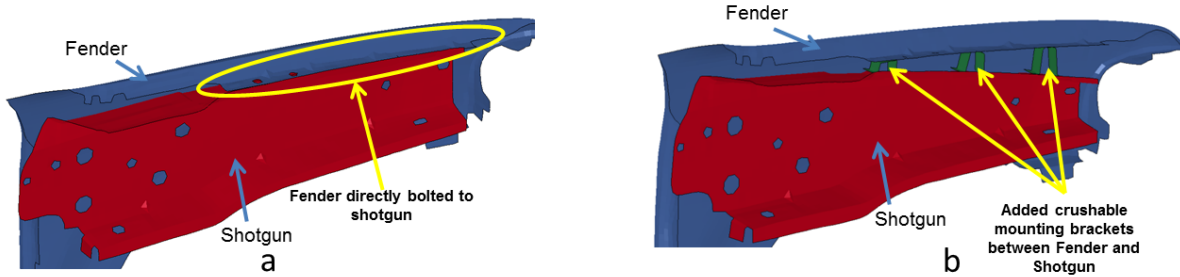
Lateral view for the shotgun to fender interface: a) fender directly bolted to shotgun, b) fender bolted to shotgun by means of crushable brackets.
